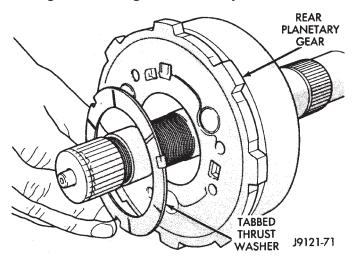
Installing Rear Planetary Thrust Washer—46RH
